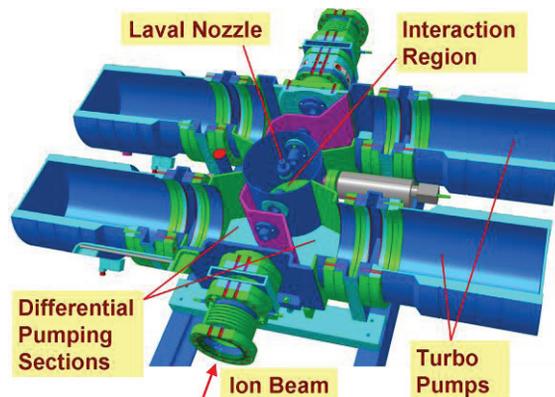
Sectional view of the UNILAC gas stripper box with differential pumping sections.
